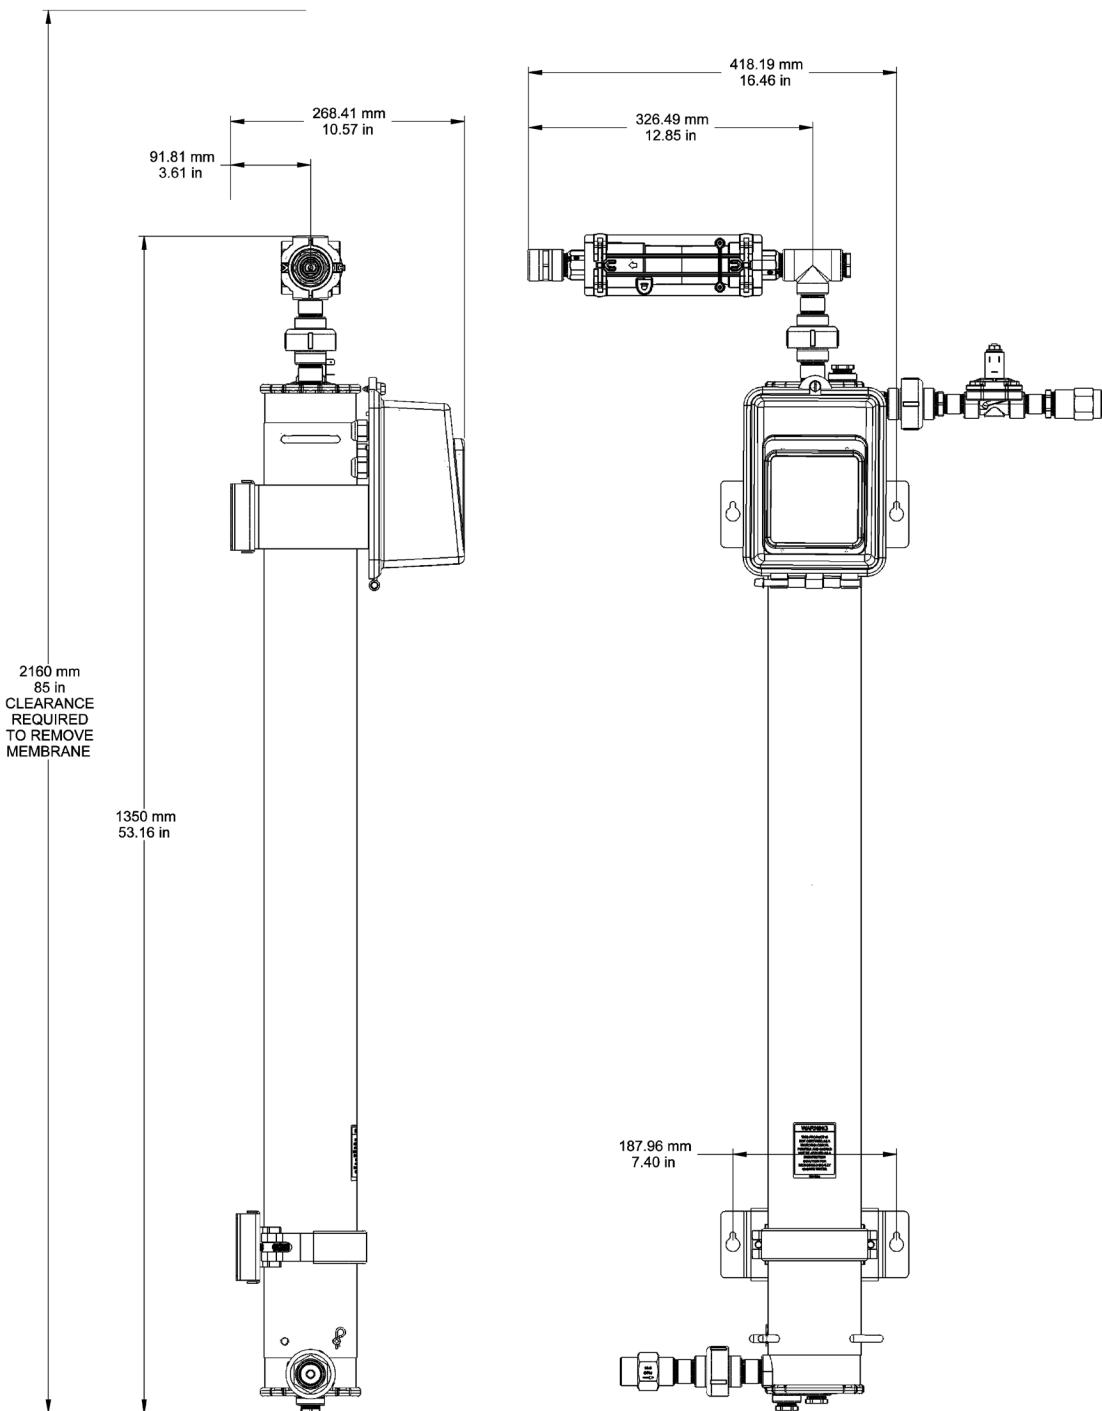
Dimensional Drawing for the FreshPoint™ Ultrafiltration System
